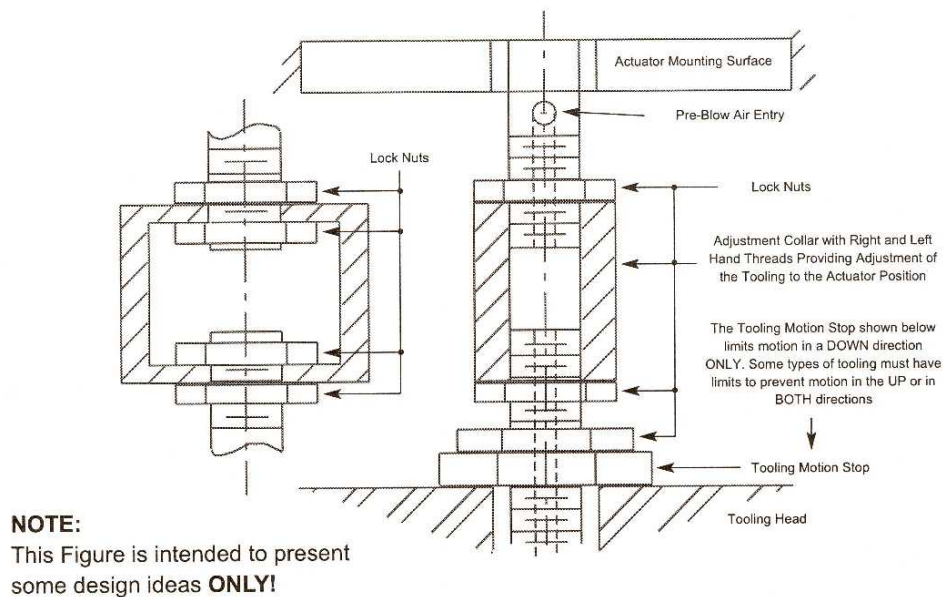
Actuator - Die Gap Tooling Mechanical Adjustment
